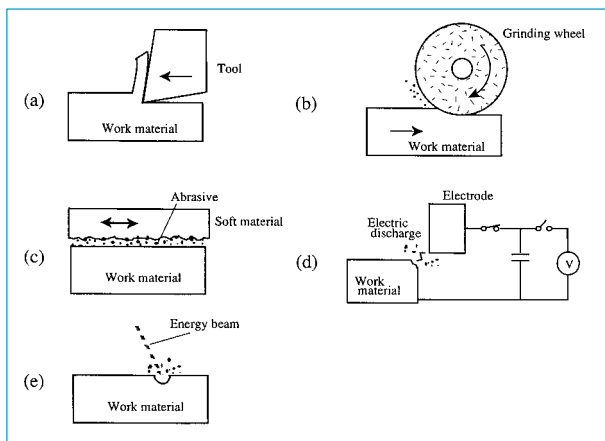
Configuration of precision machining processes (a) cutting, (b) grinding, (c) polishing, (d) electro-discharge machining, (e) beam processing
